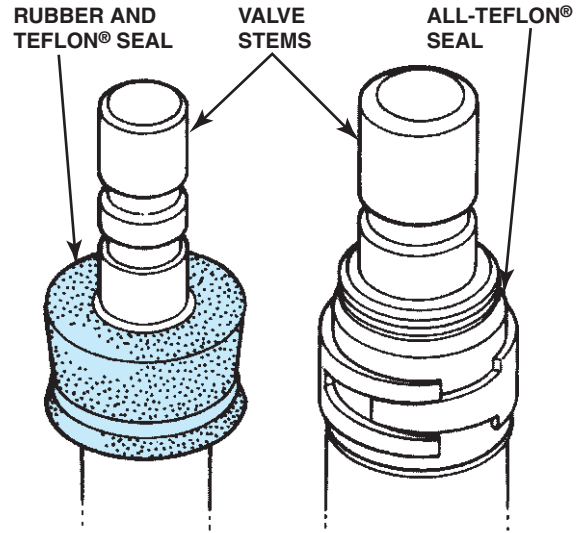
Engine vacuum can draw oil past the valve guides and into the combustion chamber. The use of valve stem seals limits the amount of oil that is drawn into the engine. If the seals are defective, excessive blue (oil) smoke is most often observed during engine start-up.
